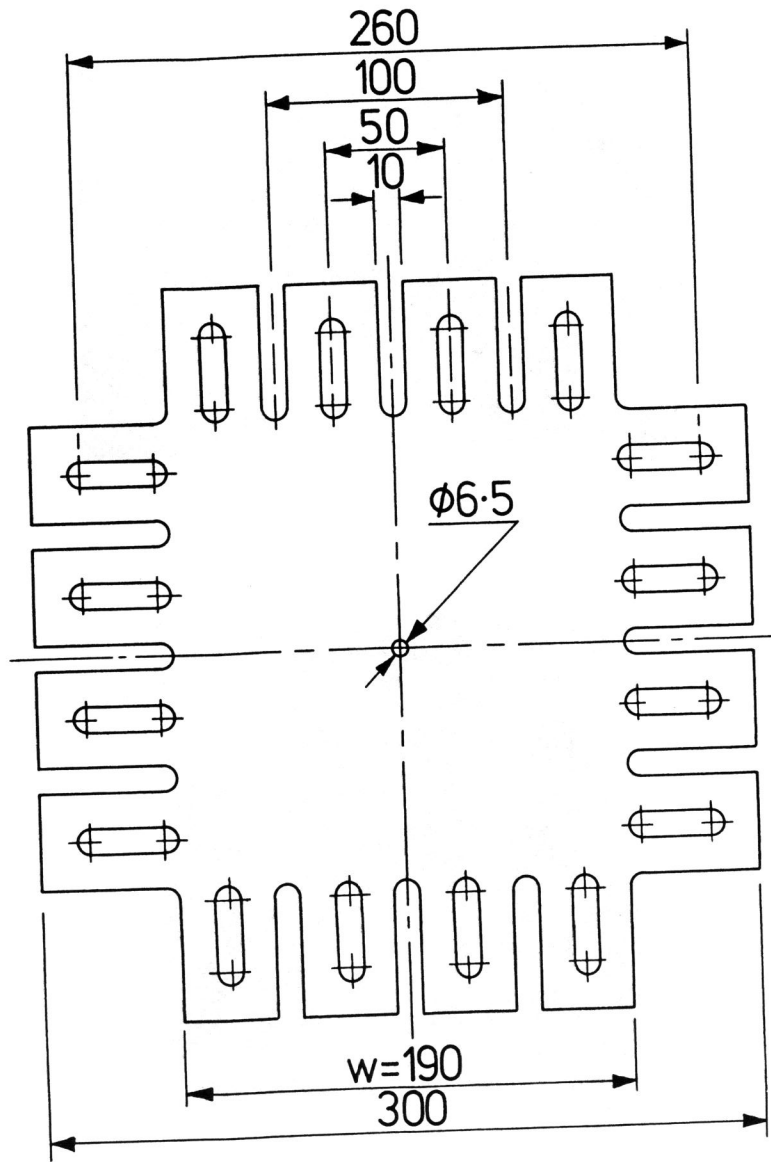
Biaxial fracture specimen design (all dimensions in millimetres).
